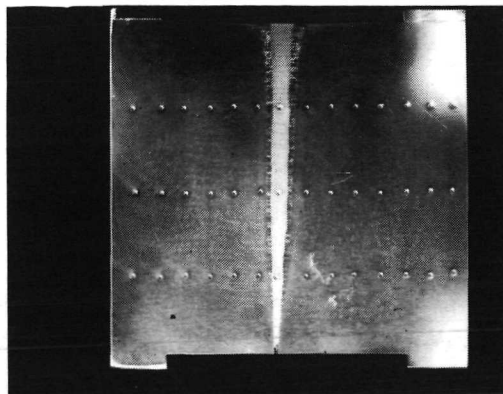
Full-cross-section photograph and Rockwell hardness readings for GMA welded 2219-T87 aluminum alloy (as welded).
